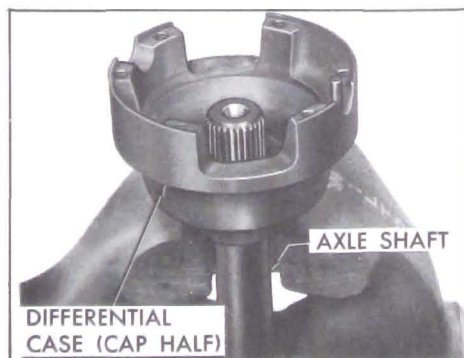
Axle Shaft &amp; Cap Half of Differential Positioned in a Vise
